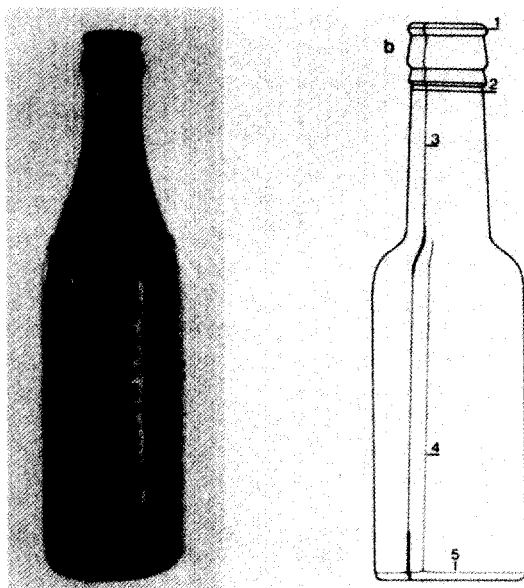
a & b. Two bottles showing typical machine-produced mold seams, including on b a “ghost” seam from the parison mold on the body (Photo by R. Chan; Drawing by D. Kappler).
